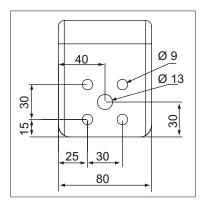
Connecting bar 80×10 with dimensions for the fastening of cable sealing end
